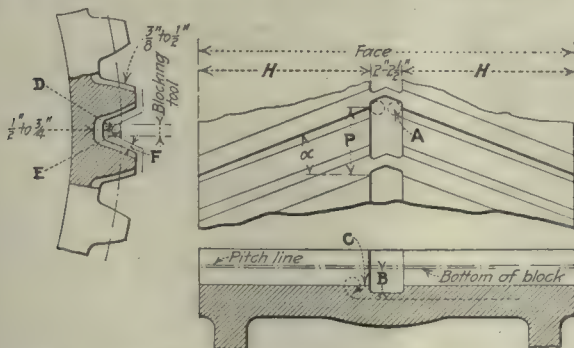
DIAGRAM TO SHOW CLEARANCE POCKET IN PLANED GEAR
